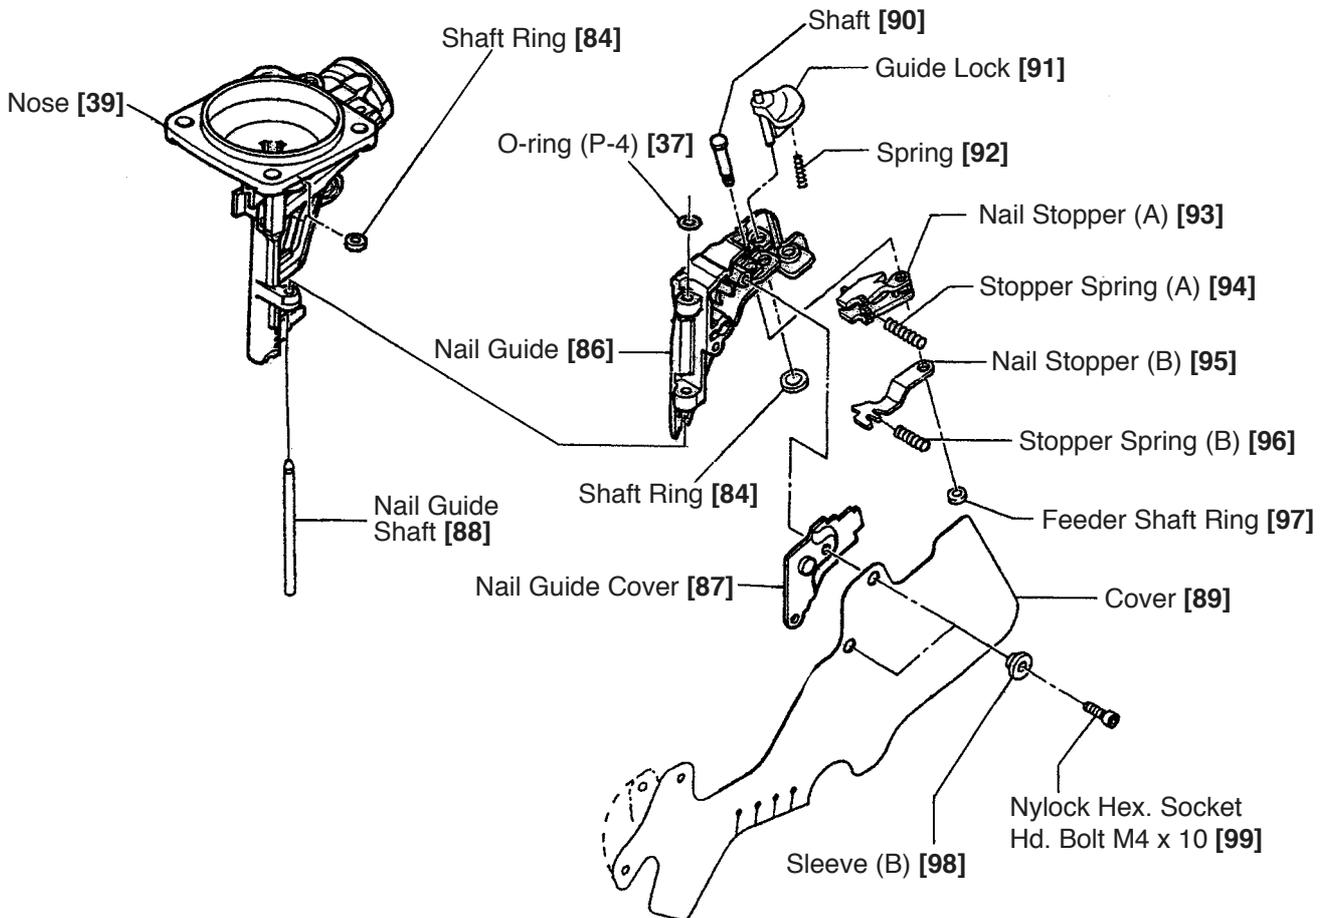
Disassembly and reassembly of the nail guide, nail stopper (A) and nail stopper (B)
